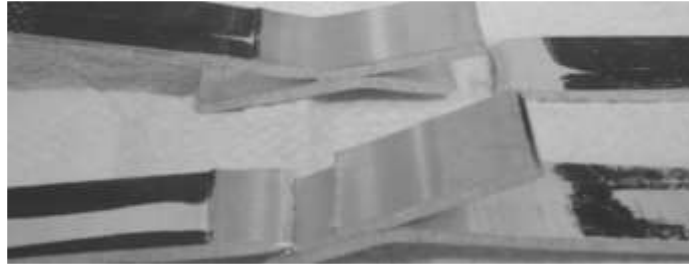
Tensile-shear tested samples of A6060 welds showing fracture in HAZ (top) and in hook region (bottom), after strengthening
